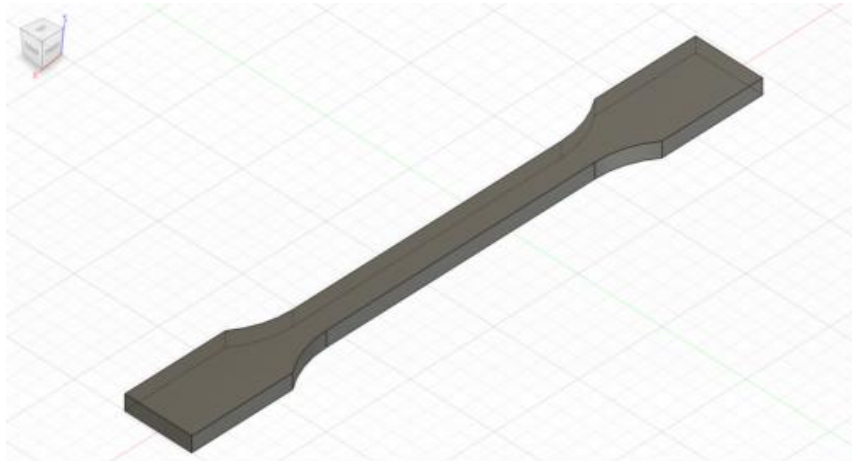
Extruded view of the 3D CAD model of the specimen.
